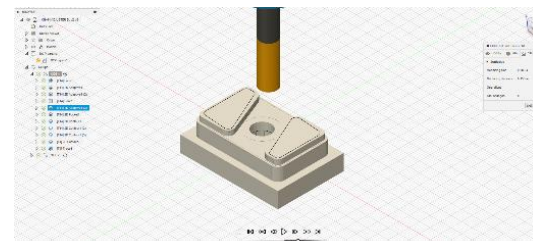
Simulation view on fusion 360 setup 1 with flat end mill 8 mm
